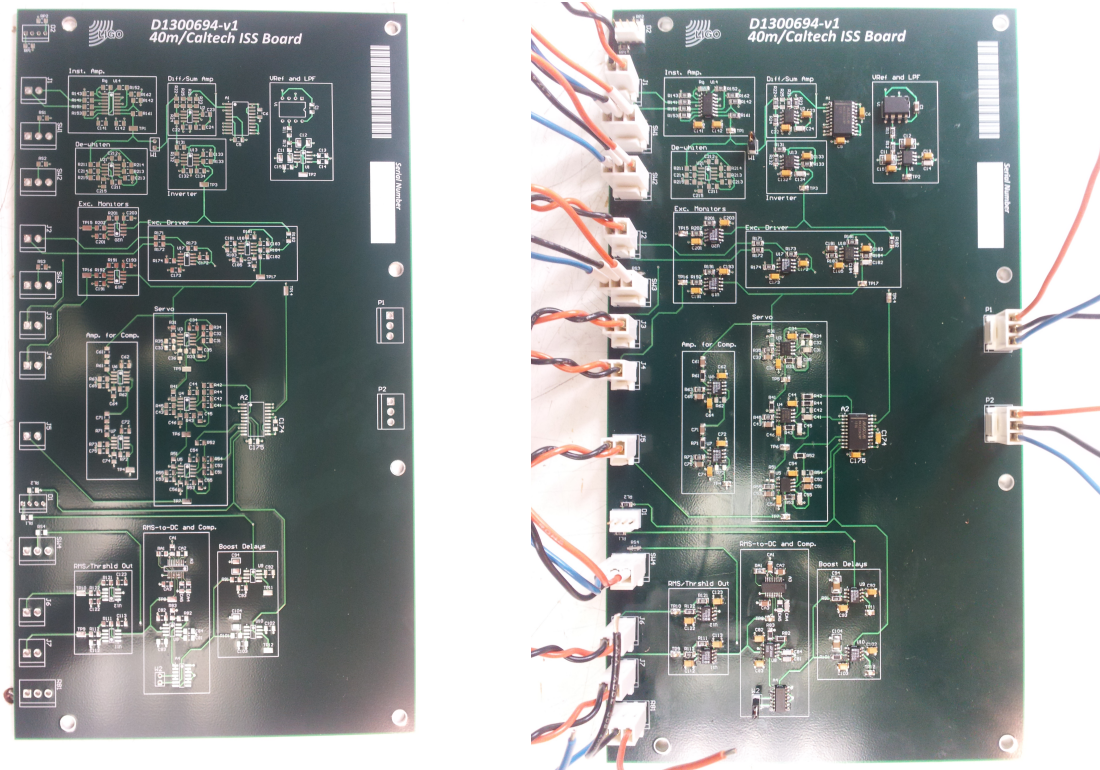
(left) Empty PCB board as received from manufacturer (right) Board stuffed with all components and with attached/wired headers.
